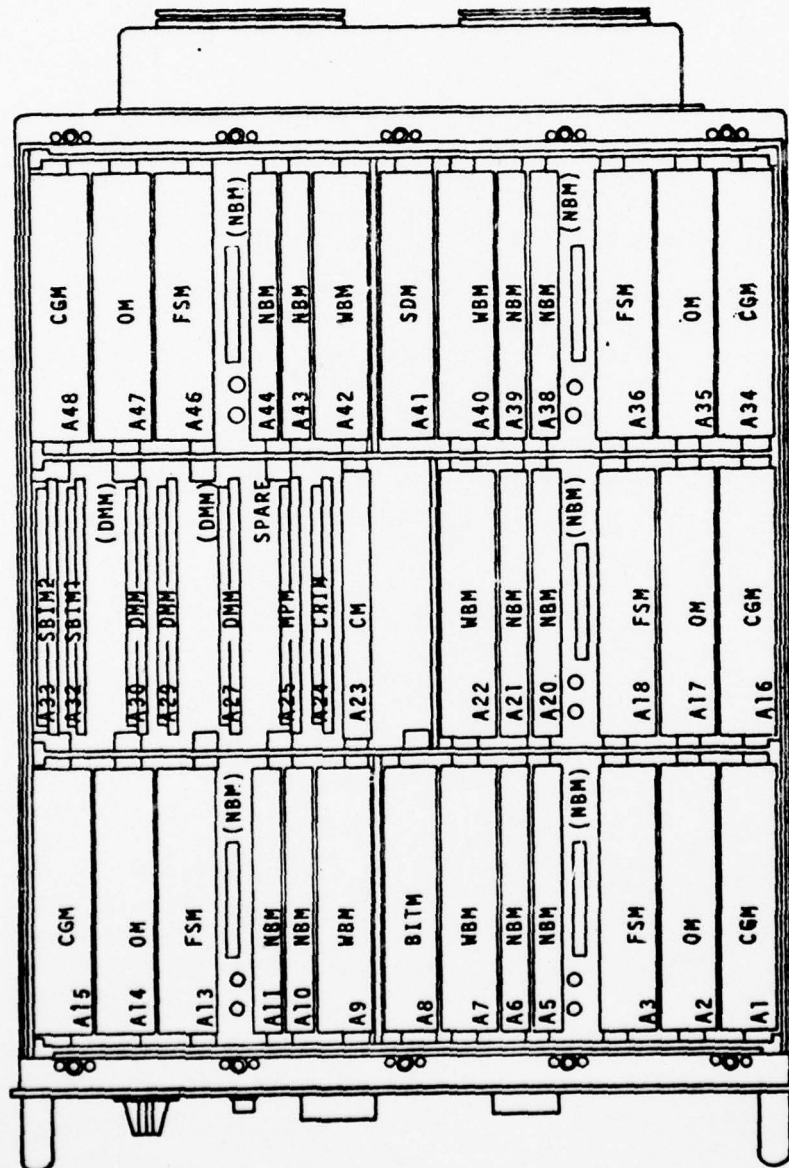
HDUE Receiver - Top View W/O Cover
